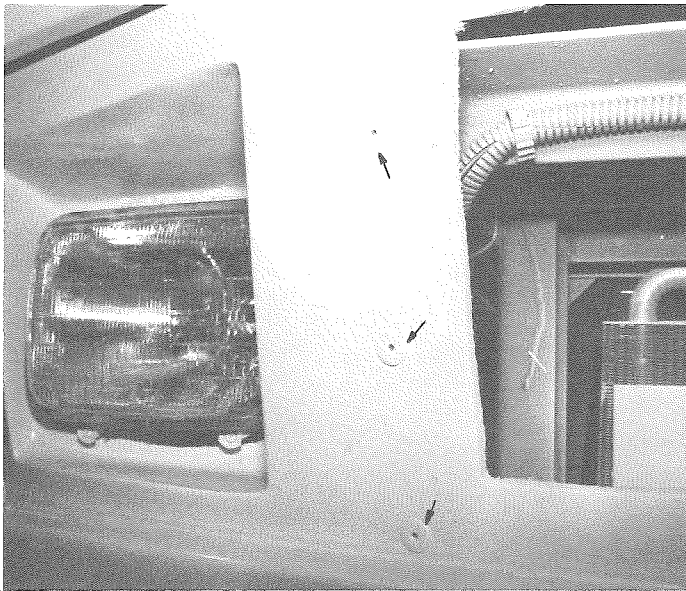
Main Front Body Panel Removal: After the simulated grille has been removed, notice 3 rivets at each side running vertical at the inner structure upright support. Remove these 6 AD66BS pop rivets, .126-.250 grip length, .192-.196 hole diameter.
